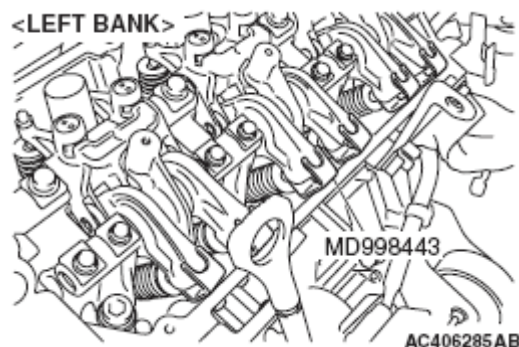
Identifying Special Tool MD998443 - Left Bank
